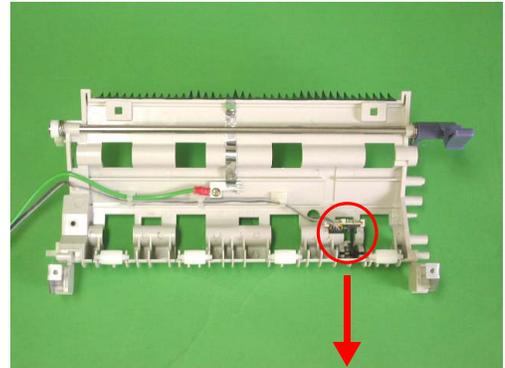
Removal of Actuator and PE Board Assembly 1
